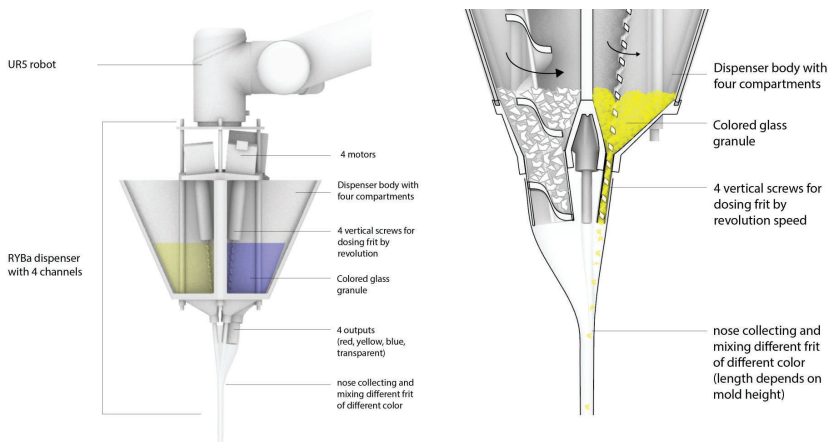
Multi-channel tool (left) elevation and detailed section (right).
